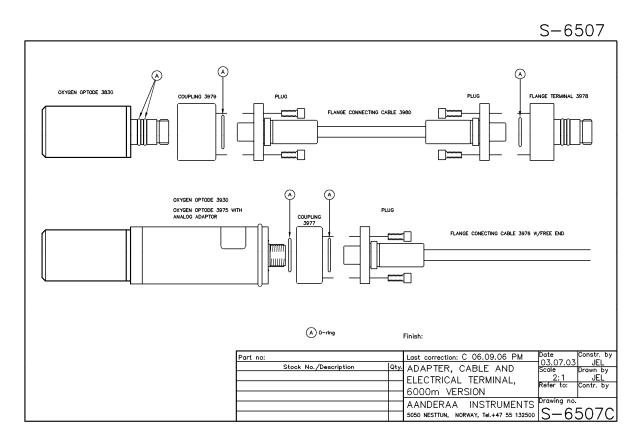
Assembly drawing of cable connection for deepwater version (1000-6000 m).
